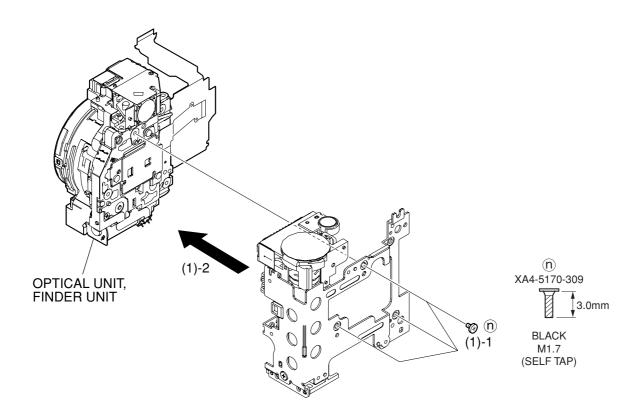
OPTICAL UNIT, FINDER UNIT - (1)
